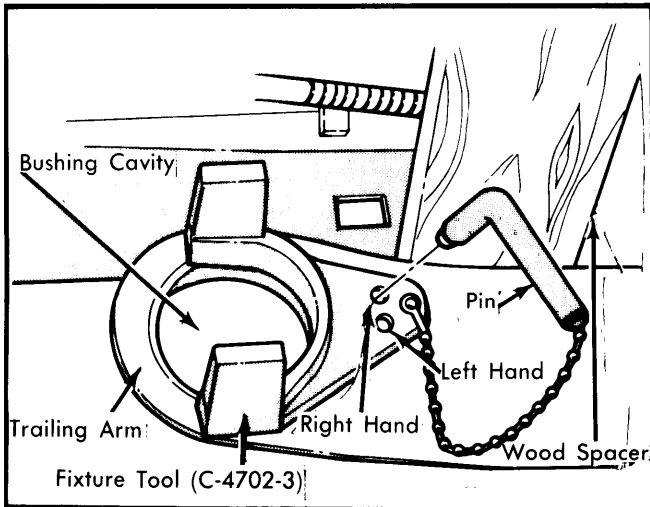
Positioning Pivot Bushing Fixture Tool to Arm
